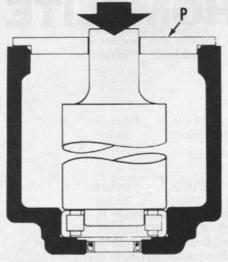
Position aligning plate (P) 24895 as shown to center bearing installation tool 24893 when installing bearing in housing.
